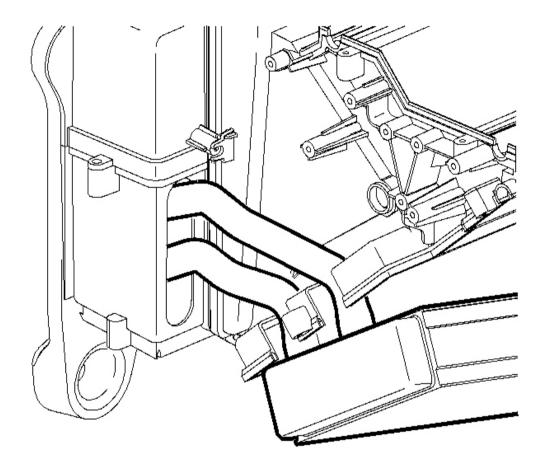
Heater Core Pipe Cover Courtesy of GENERAL MOTORS CORP.
